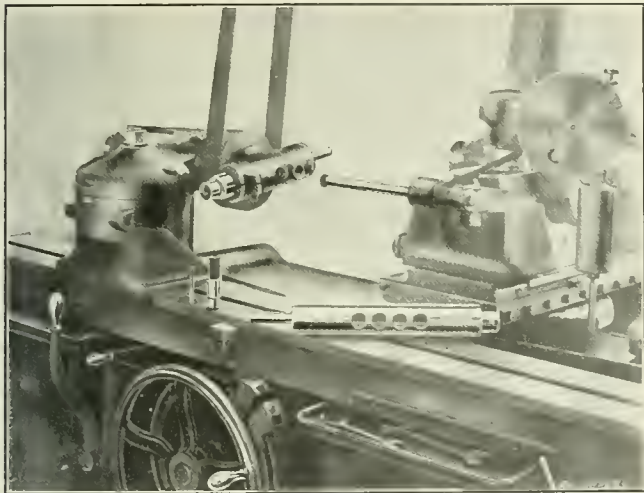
Fixture for Grinding Clutch-pin Holes in Speed-change Shafts
